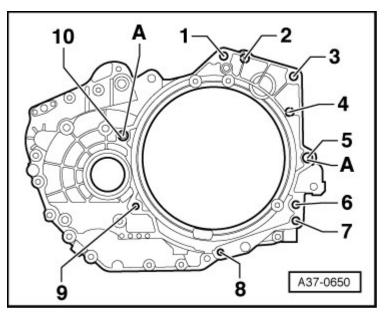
Identifying Bolts On Engine/Transmission Flange Courtesy of AUDI OF AMERICA, LLC
